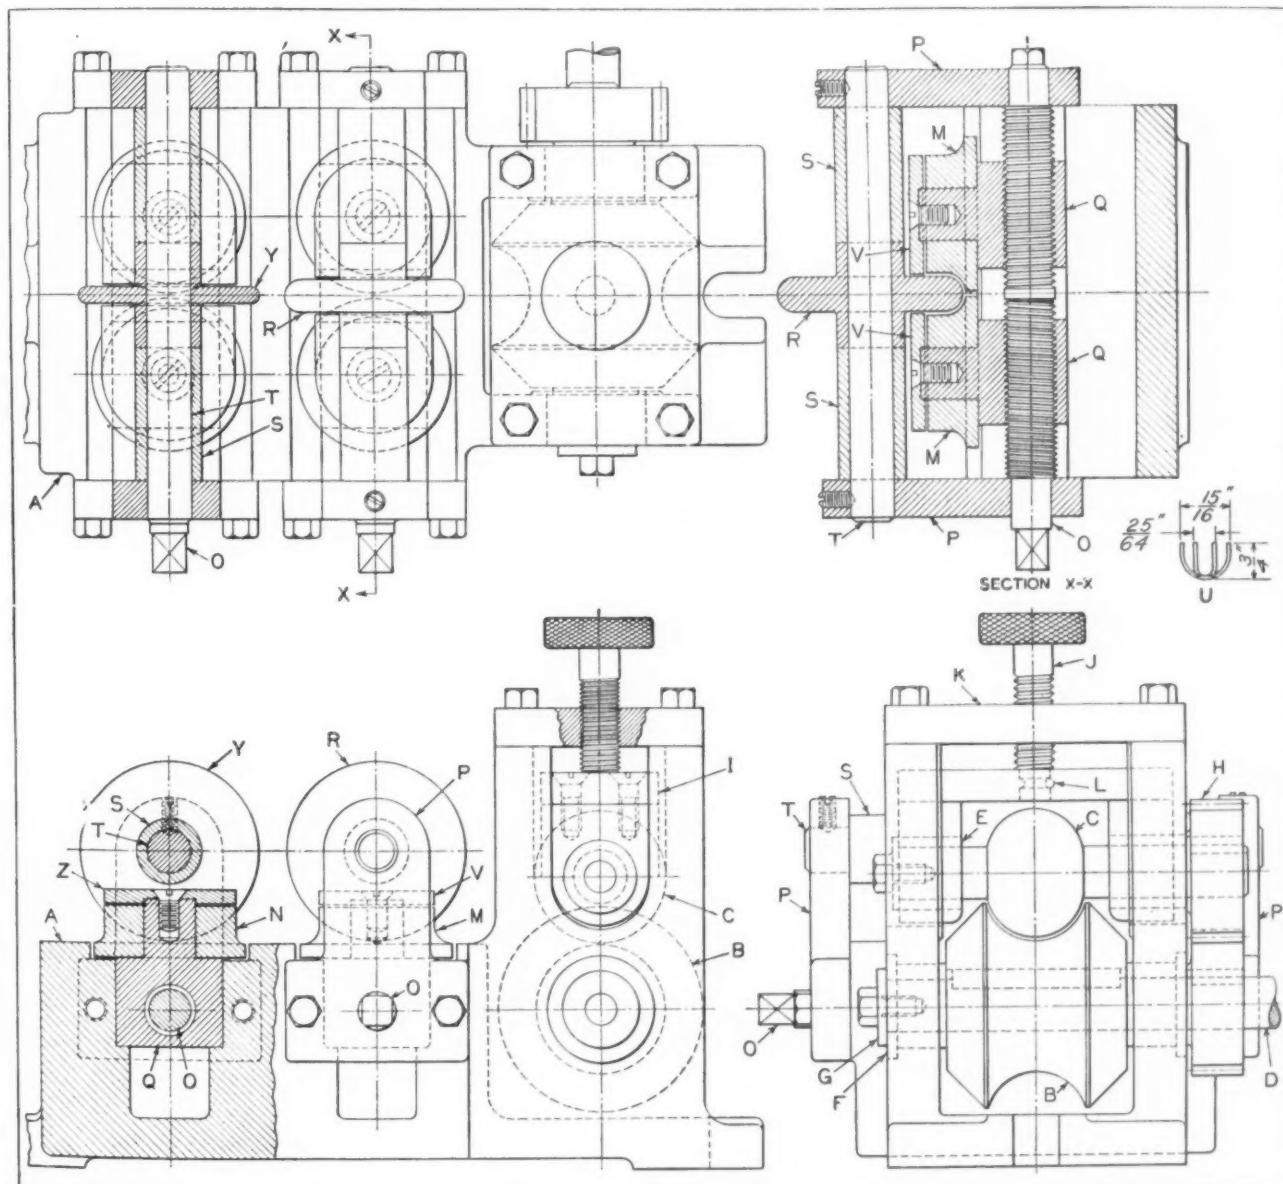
Adjustable-roll Type Forming Mill for Rolling Sections such as Shown at U
